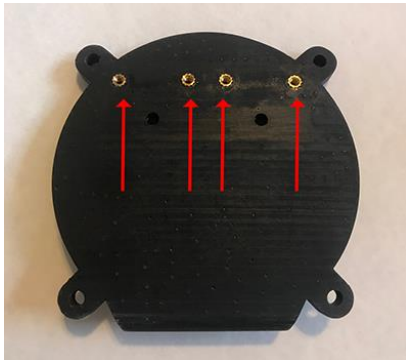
Threaded fittings are installed on the outside face of the 3D printed lid.
